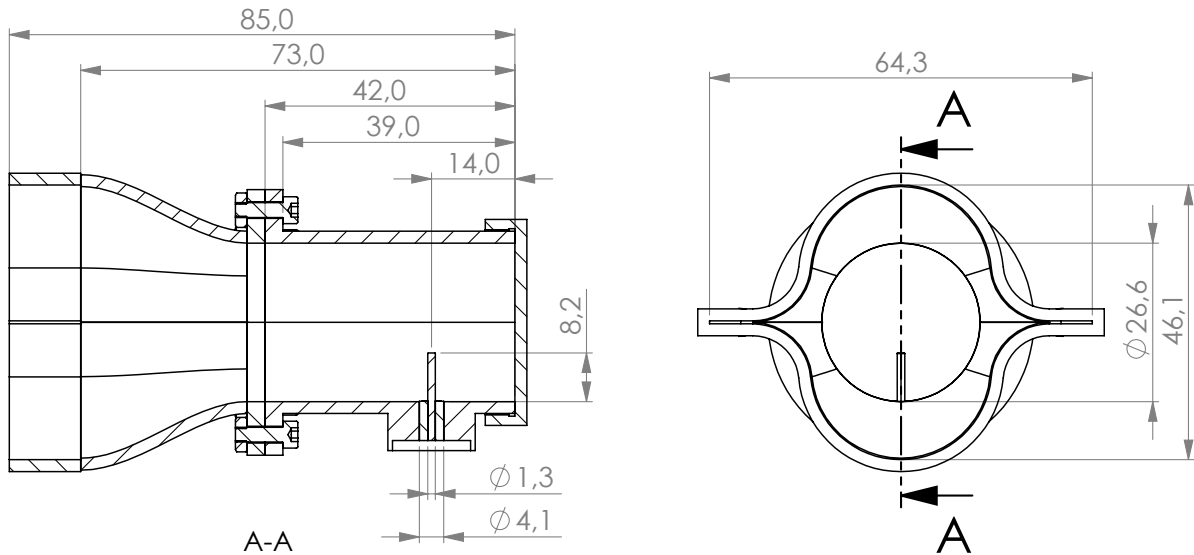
Drawing of the mode CTM converter and probe-fed adapter. Dimensions are given in mm.
